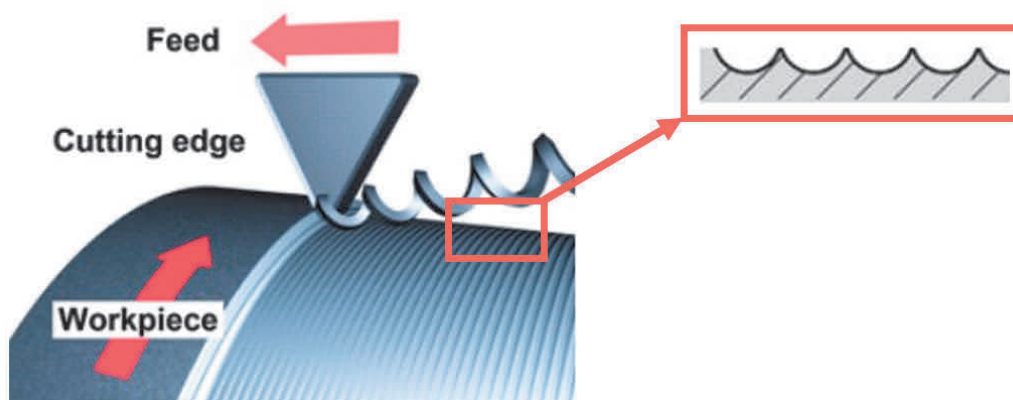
Turning surface definition (right - general definition, left - detail of machined surface) [4,5]
